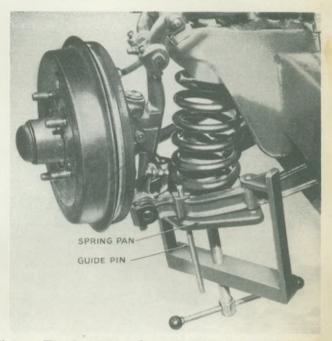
Employment of compressor for L.H. front spring removal—Tool No. 20S.50.
